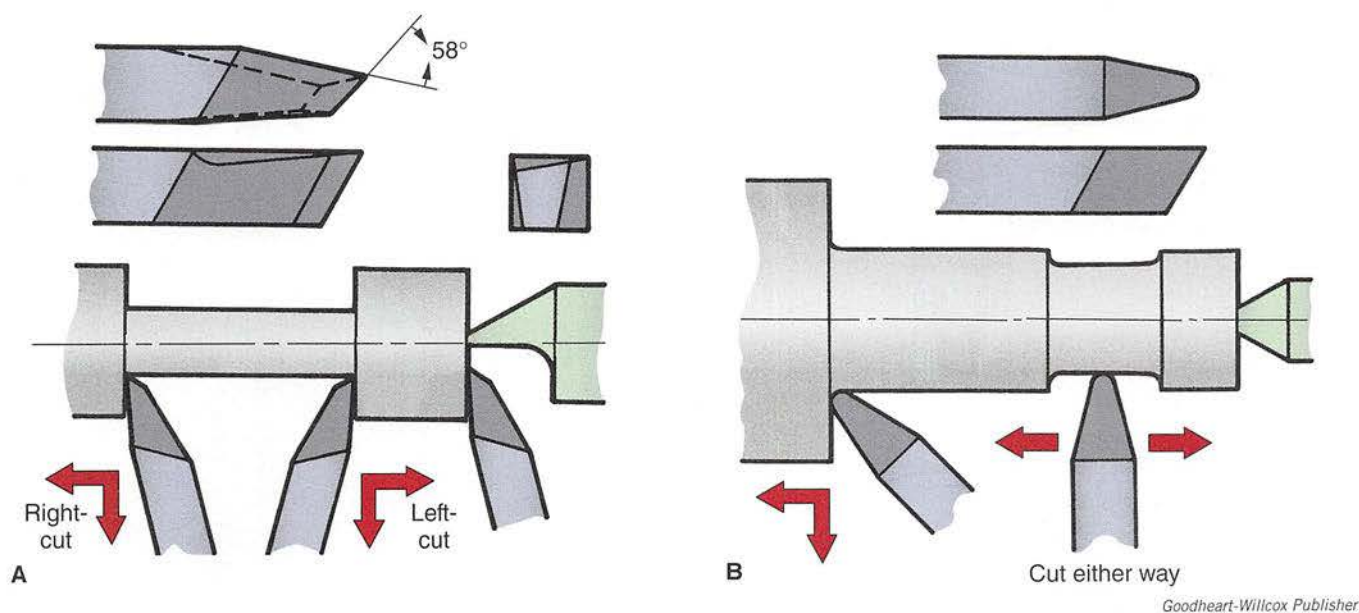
Lathe tools. A—A facing tool is used to machine surfaces perpendicular to the spindle centerline. B—A round-nose tool produces fillets. Its shape permits it to cut either left or right.
